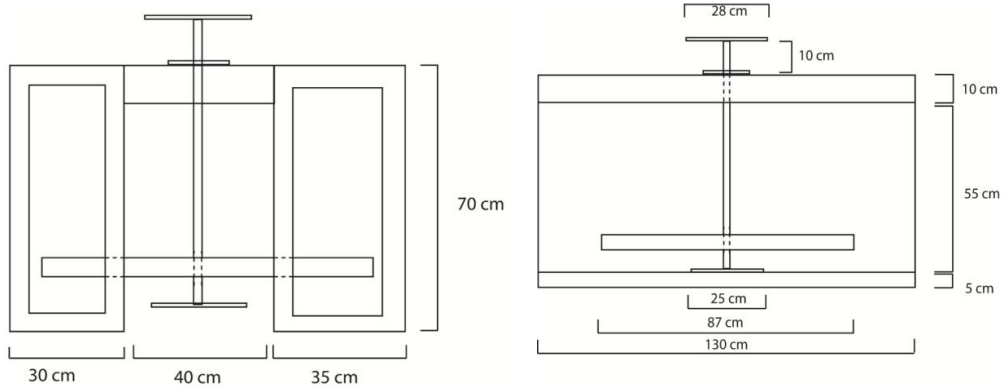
Basalt Excavated in Palestine, 1200-1150 BC. Picture 7: Drawings For The Usage Of Basalt As Hand Wheel Or Kick Wheel.
